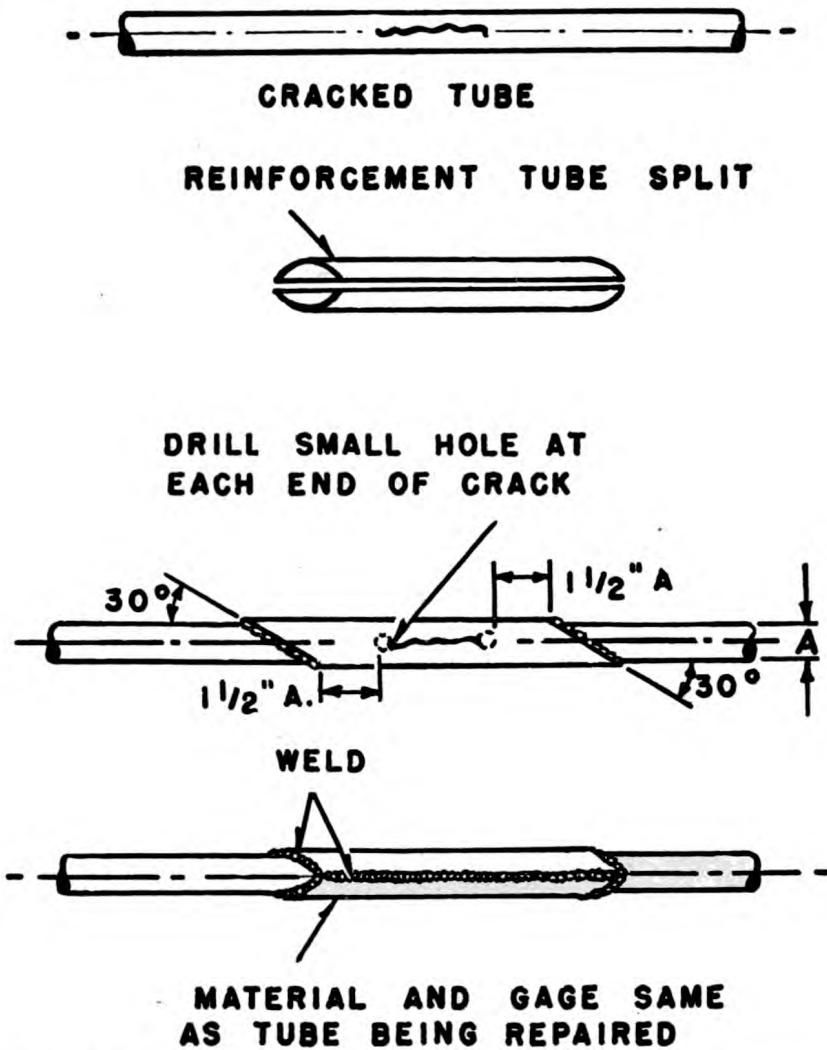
Cracked-tube reinforcement by means of a split sleeve.
